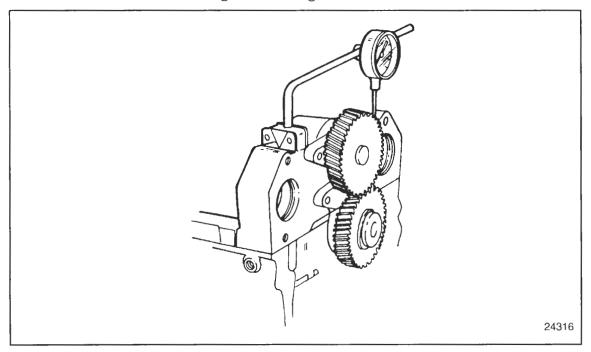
Crankshaft Timing Gear-to-Oil Drive Gear Lash Measurement
